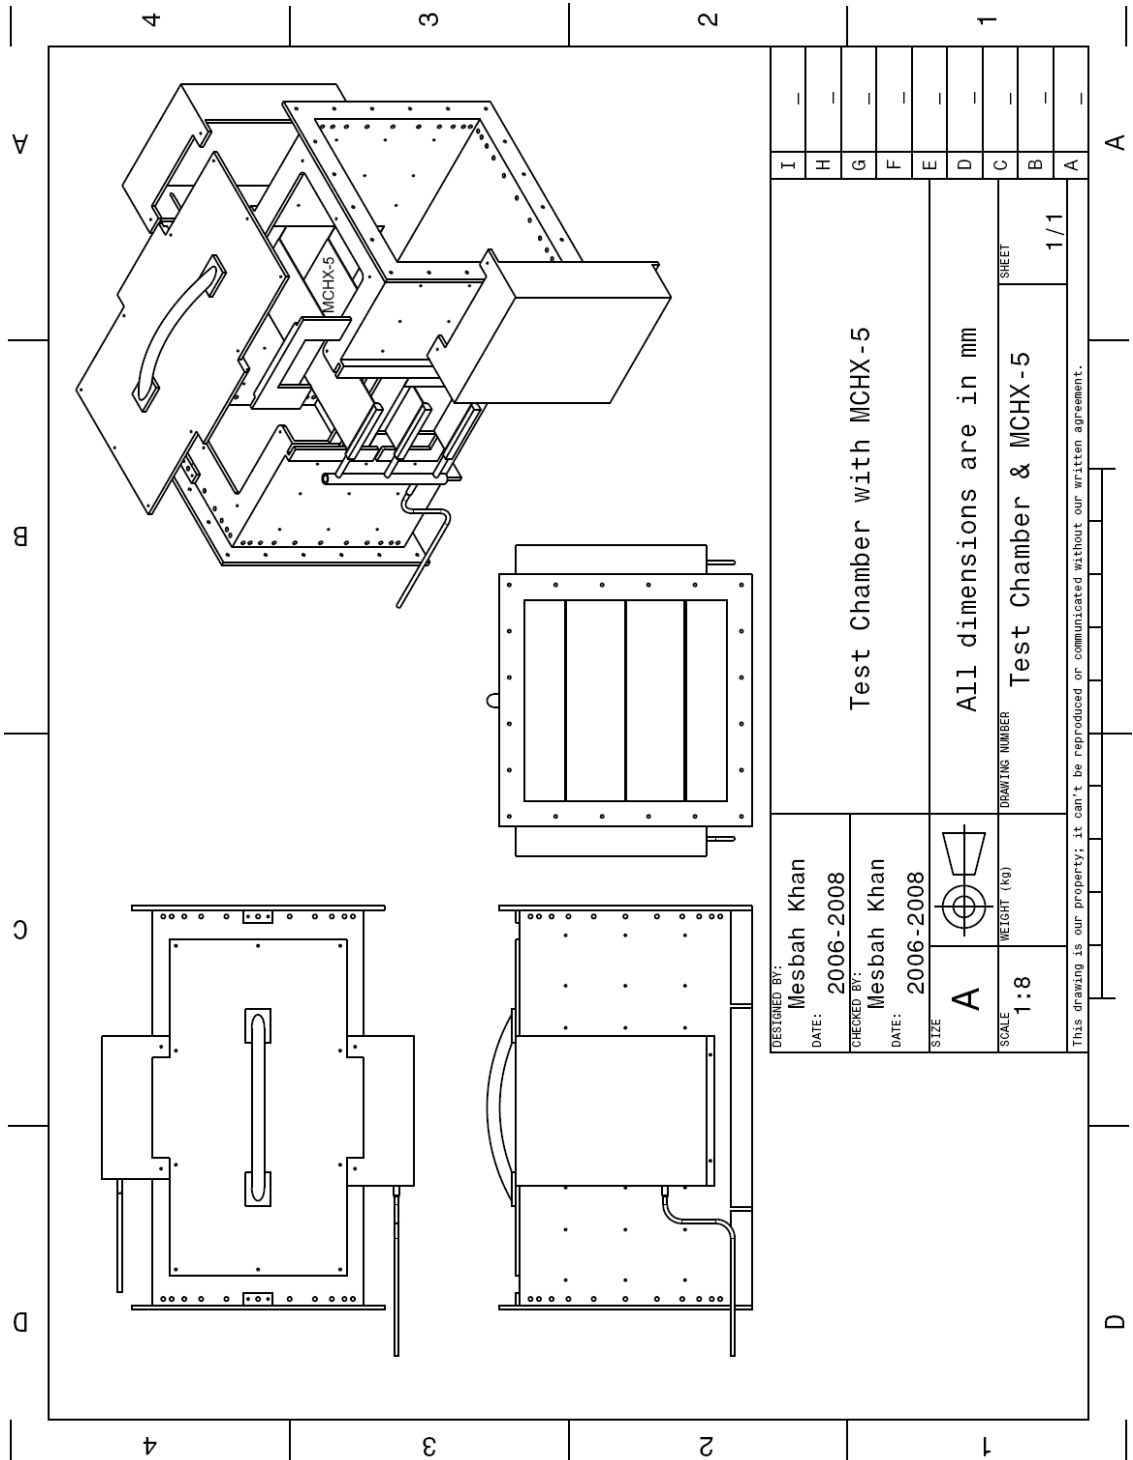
Design of test chamber support structures for test specimens MCHX-5
